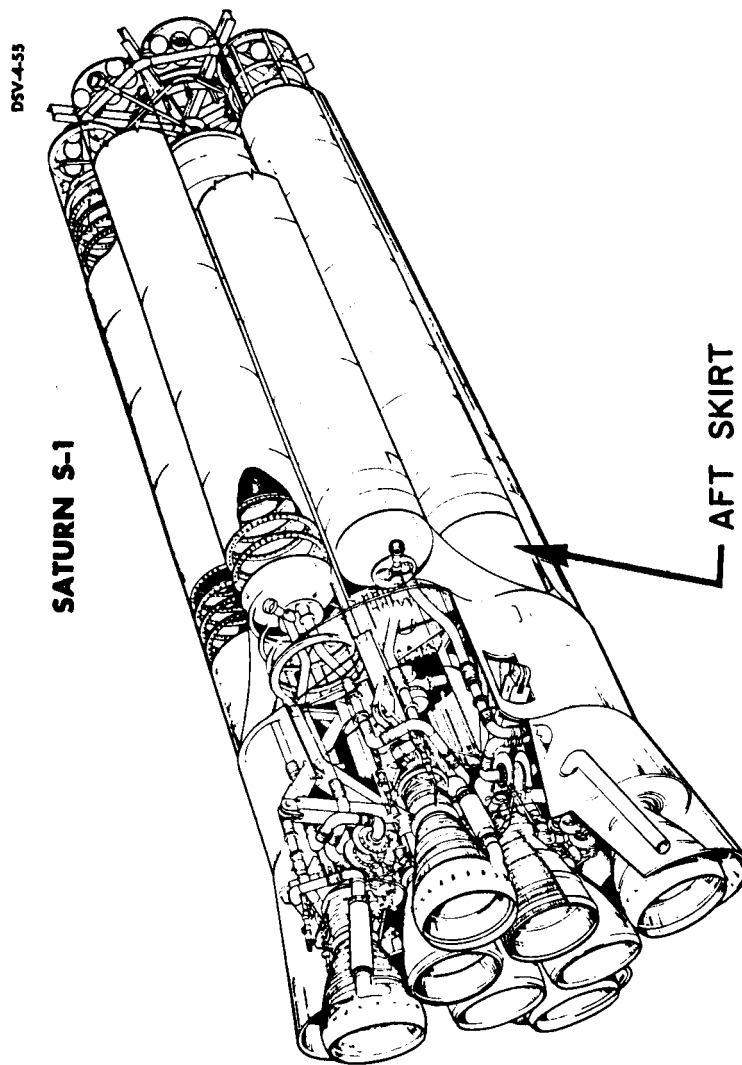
DRAWING OF SA-5 SHOWING AFT SKIRTS ON FUEL TANKS
